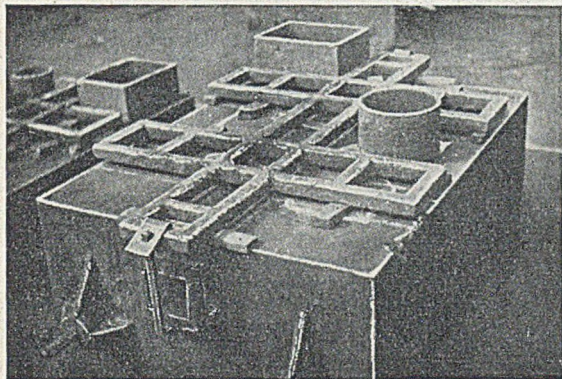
CAST IRON GRID AND WEDGES USED TO HOLD DOWN CORES AFTER ASSEMBLY IN THE MOULD.
